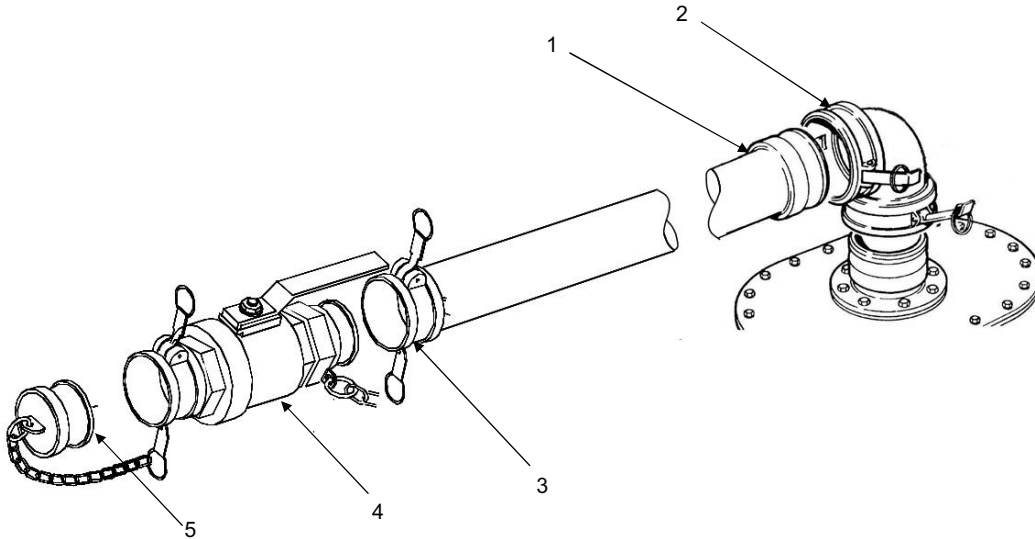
Filler Elbow, Filler Hose, and Filler Shutoff Valve.
